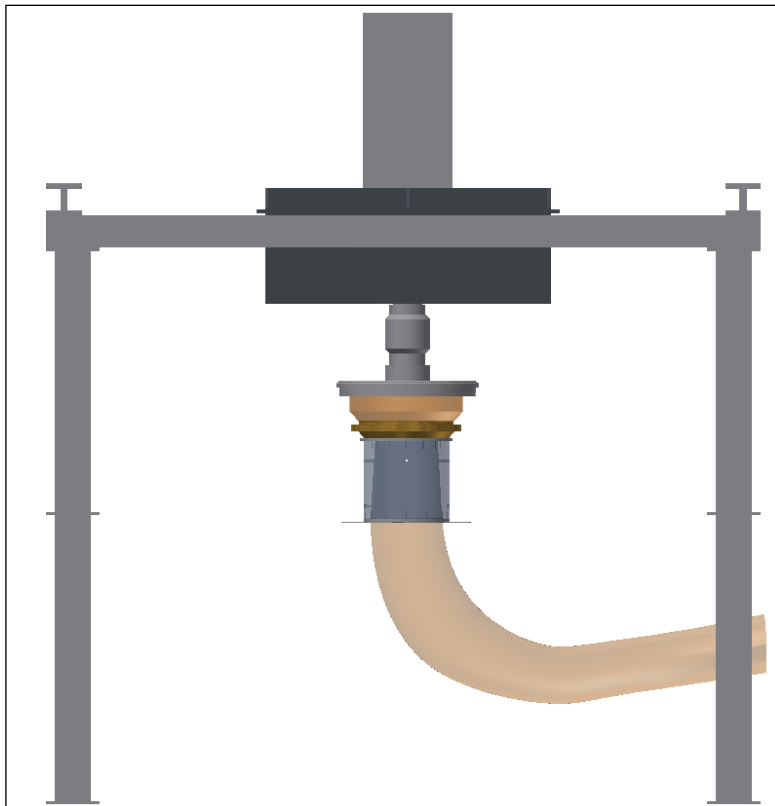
3D CAD drawing of the suggested design of the structure supporting the generator and the turbine. View from the side.
